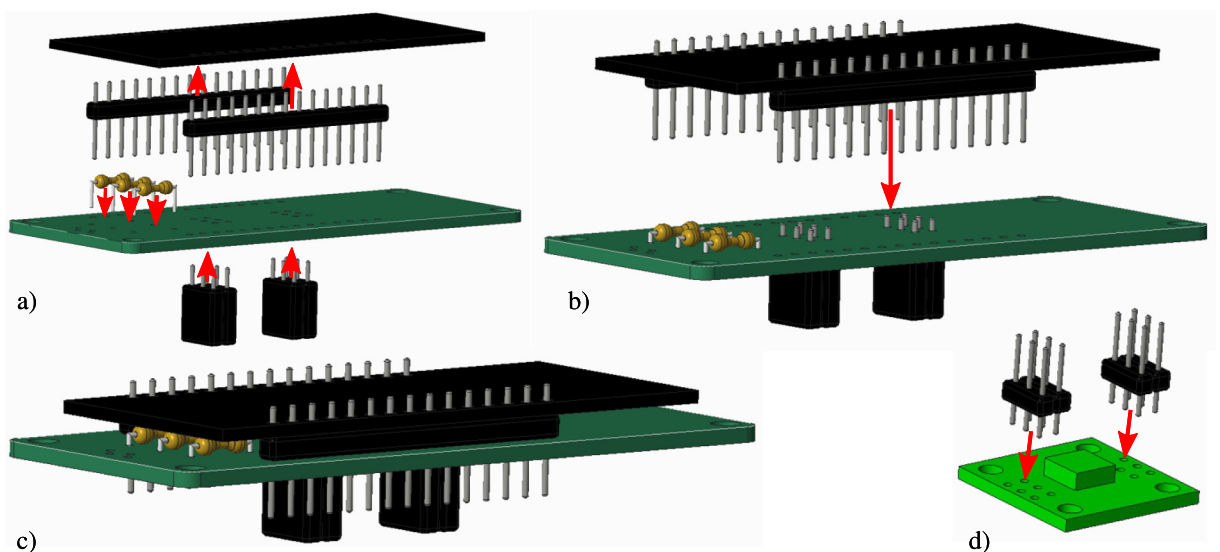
PCB assembly. a) Resistors and 2 × 3 female headers are soldered to the PCB, and 1X15 male headers are soldered to the MCU. b) MCU is soldered to the PCB. c) Finished PCB. d) 2 × 3 male headers are soldered to the ACC.
